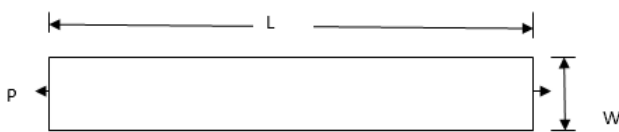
Dimensions Of Tensile Test Specimen (ASTM D 3039)
